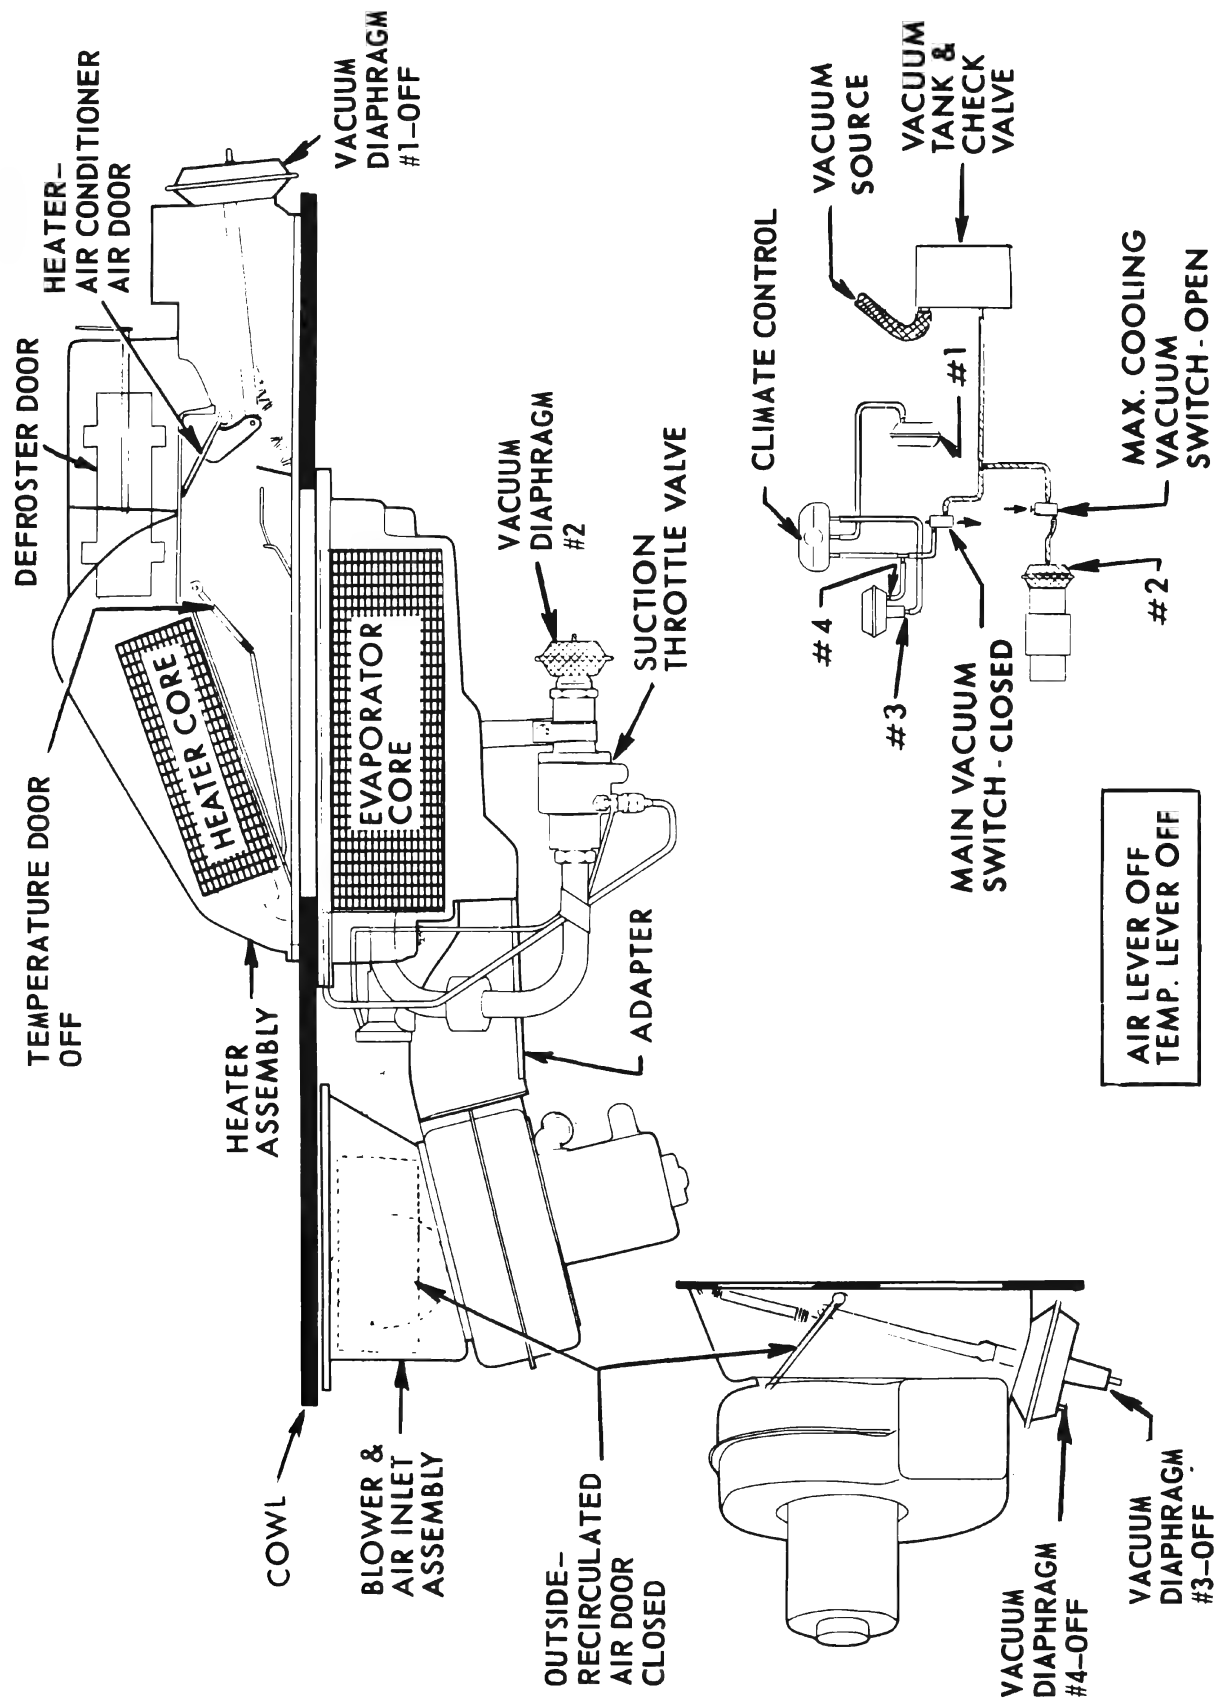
Air Conditioner and Heater Off - 4400, 4600 and 4800 Series
